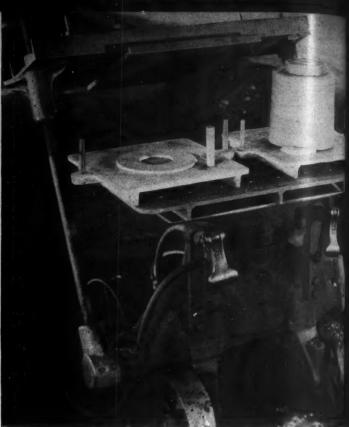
(above) Core knockout pattern equipment for making the knockout test core. Fig. 4—(right) Pattern equipment used to make the mold for core knockout test casting.
